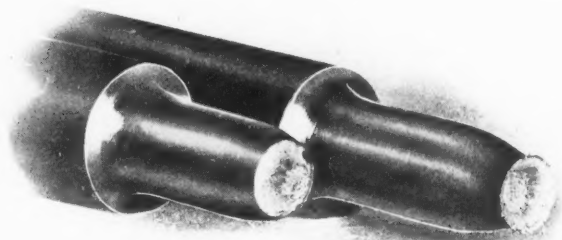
Test Bar, 1-2 inch Diameter, Vanadium Crank-shaft Steel. Cup Fracture.
